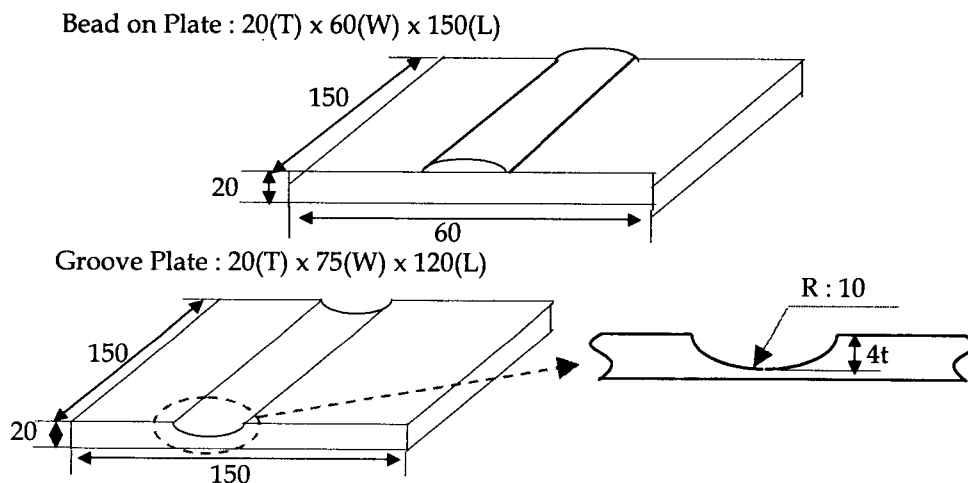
A Schematic configuration of PTA Welding Joint
